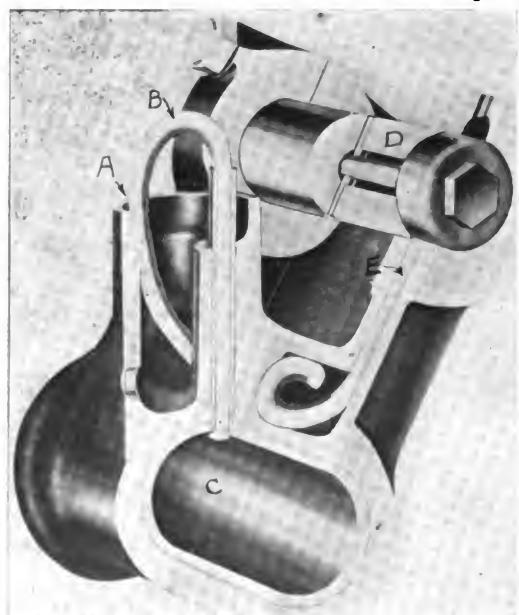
Sectional view of Myers magazine oiling system on rear spring shackle. Reservoir A holds the supply of oil
